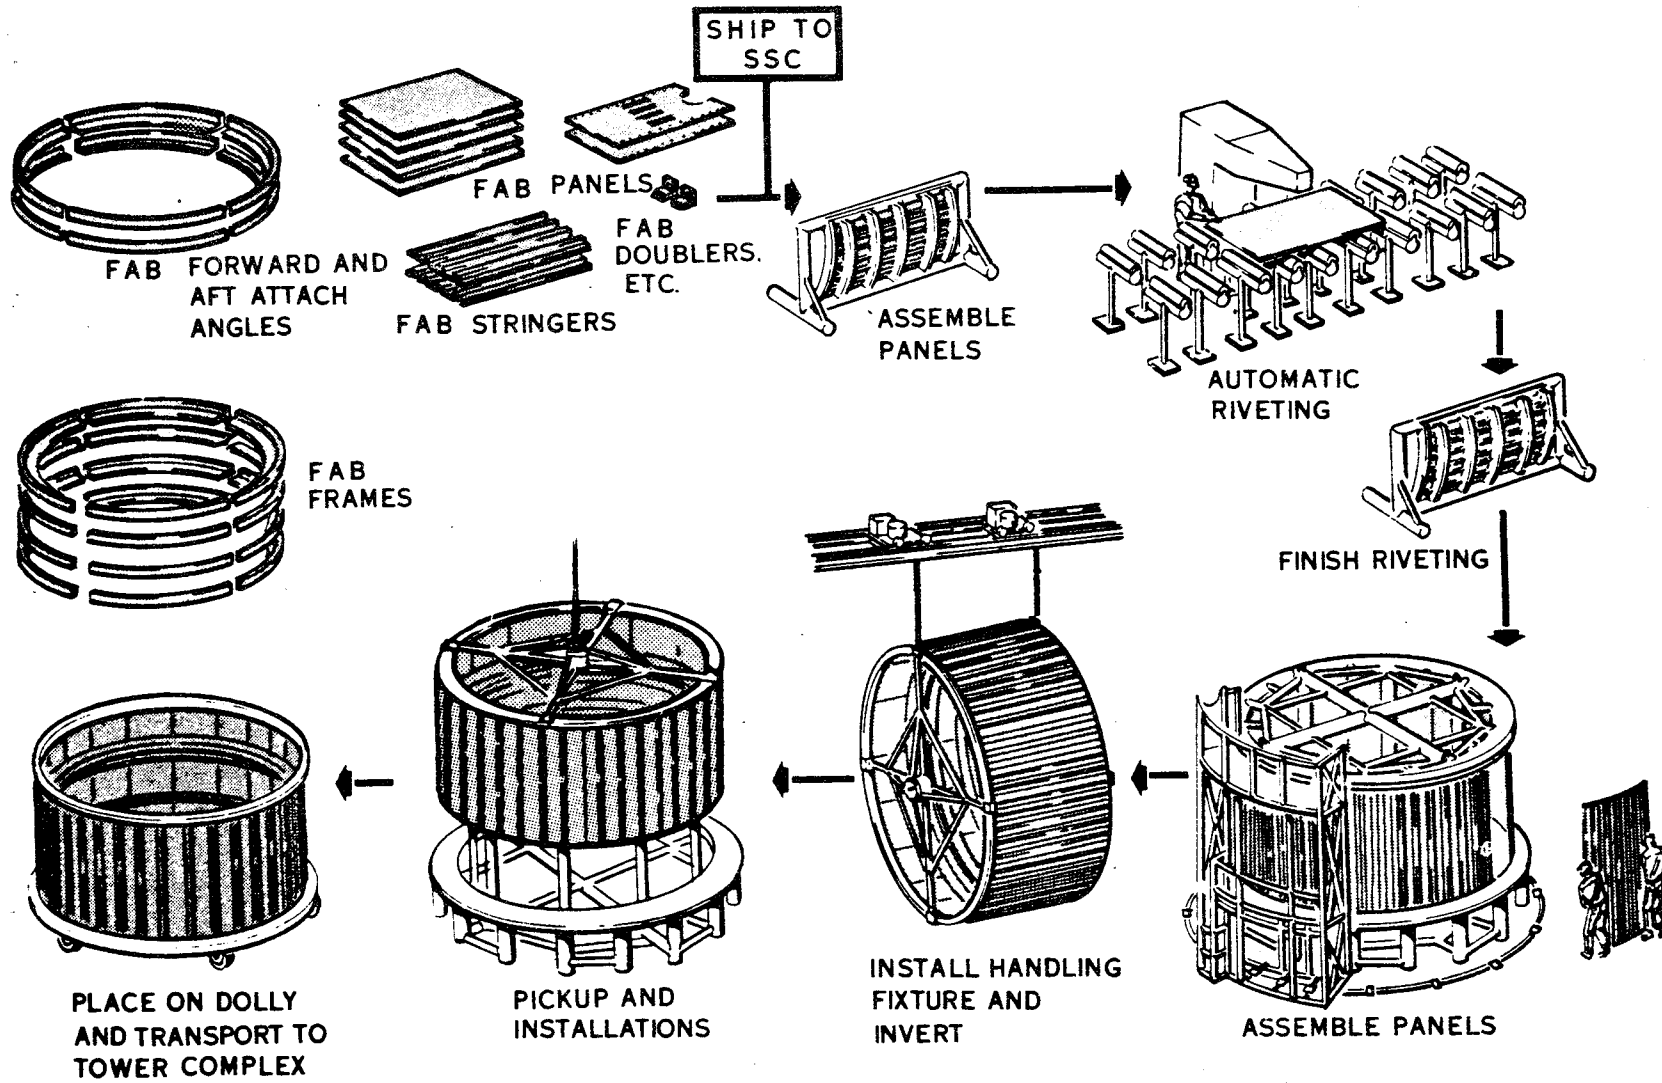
S-IVB FORWARD SKIRT FABRICATION AND ASSEMBLY SEQUENCE
